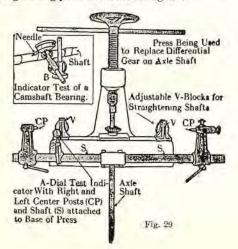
Universal shaft-testing and straightening device and arbor press in one unit. (A) shows the dial indicator on shaft (S); (B) gives an idea how the needle point of the dial indicator is used to test the concentricity of a shaft when placed between the center posts (CP).
